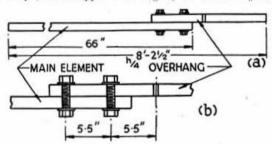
Fig. I. Radiator dimensions for the Tele-Ten Beam Aerial.
